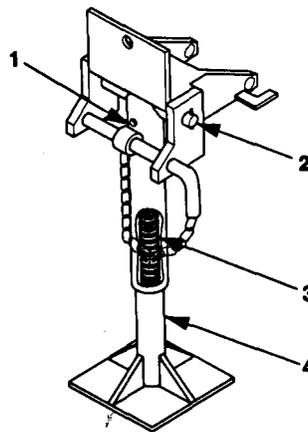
Rear Leveling-Support Jack Lubrication Points.
